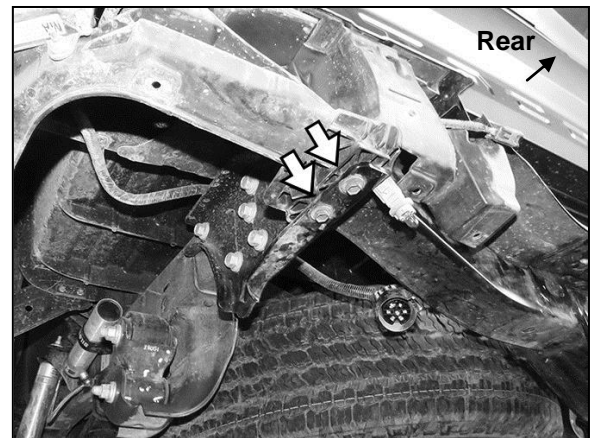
Models without factory receiver hitch: Remove factory hex bolts attaching bracket to side of frame (driver/left side pictured)
